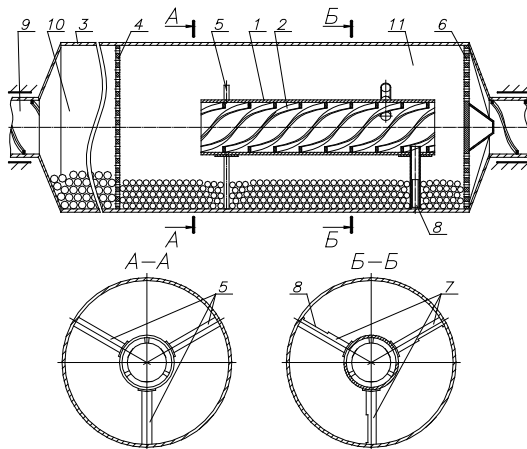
Design diagram of a mill equipped with a classifying device and a recycling
